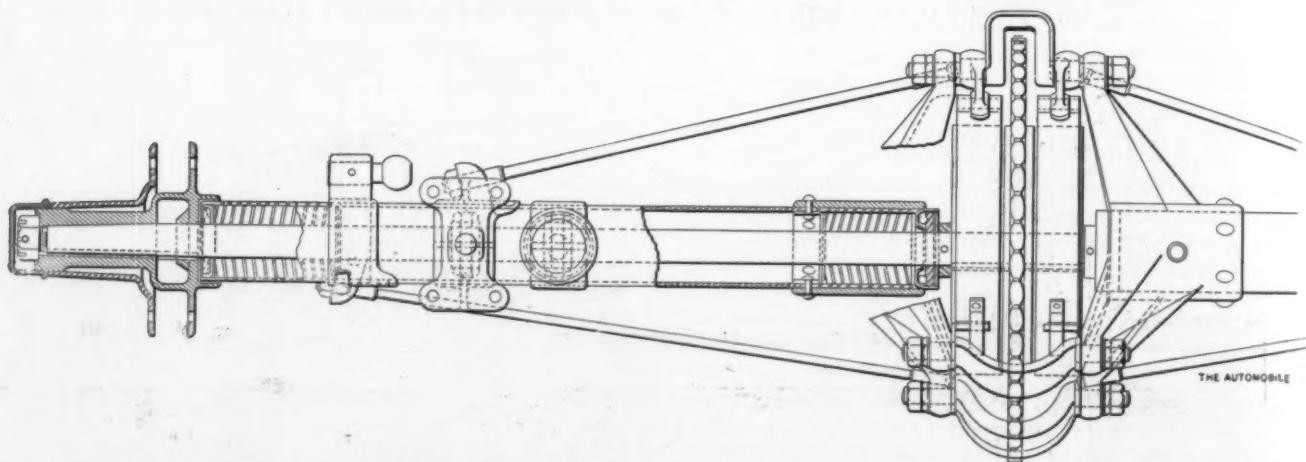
DOUBLE TRUSSED REAR AXLE WITH CHAIN DRIVE SHAFTS ON ROLLER BEARINGS AND WHEELS KEYED TO SHAFTS.
